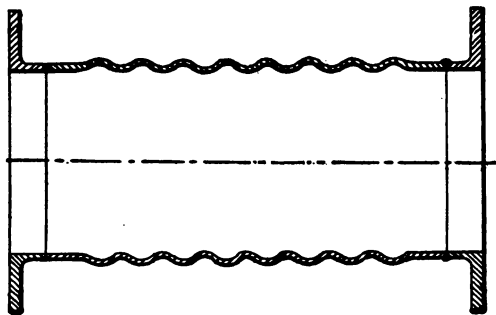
Expansion coupling welded between pipe flanges.
